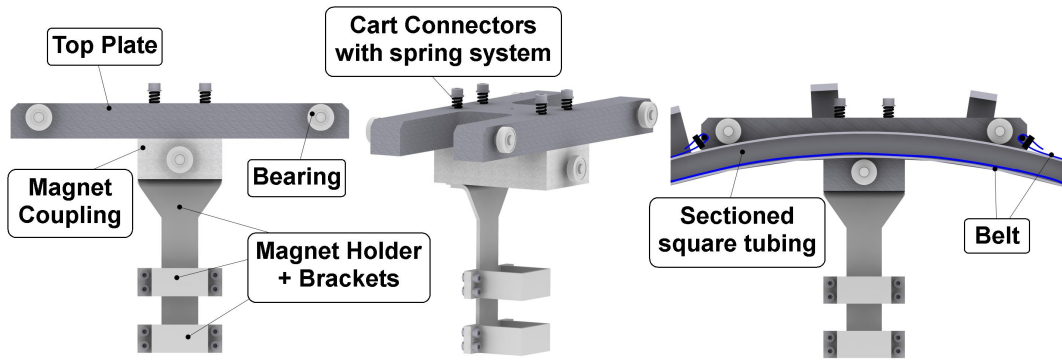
Cart Design (Front view, Isometric view, Sectioned Arch Assembly view)
